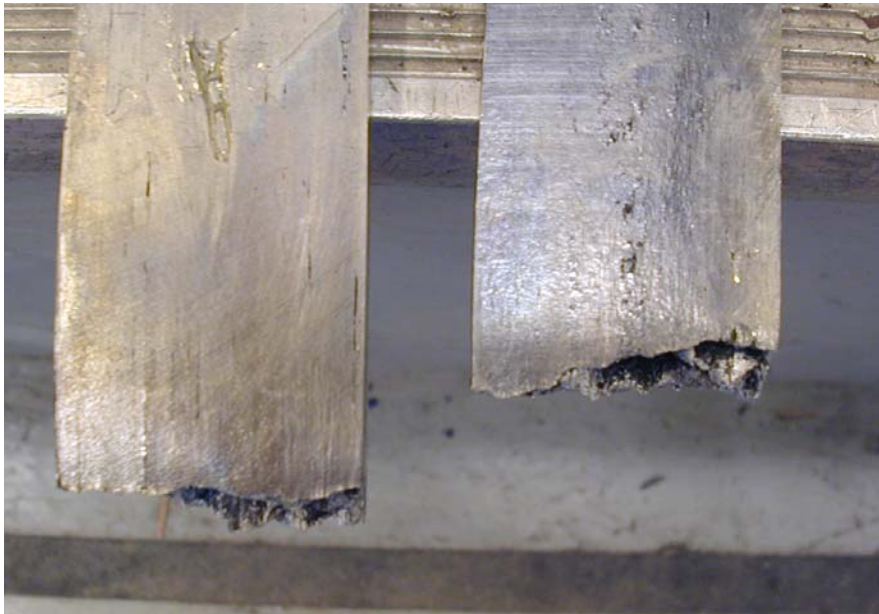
Typical Fracture Surface of Wrought Iron Tensile Coupons
